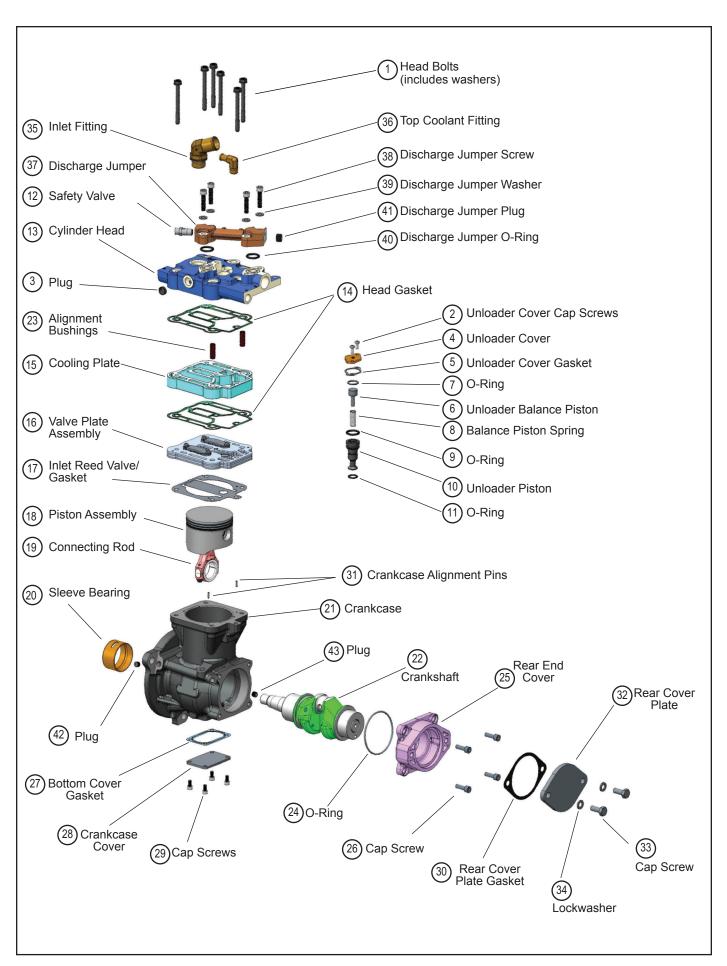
BENDIX® SNA-01™ COMPRESSOR EXPLODED VIEW.
